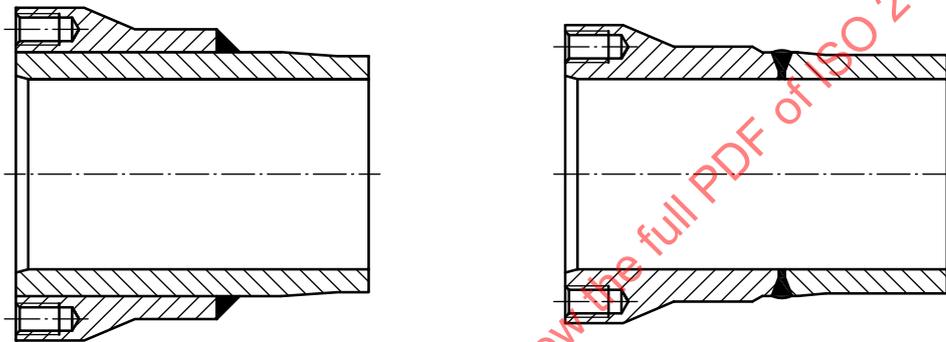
Cylinder head flange welds, fillet weld (left) and butt weld (right)
